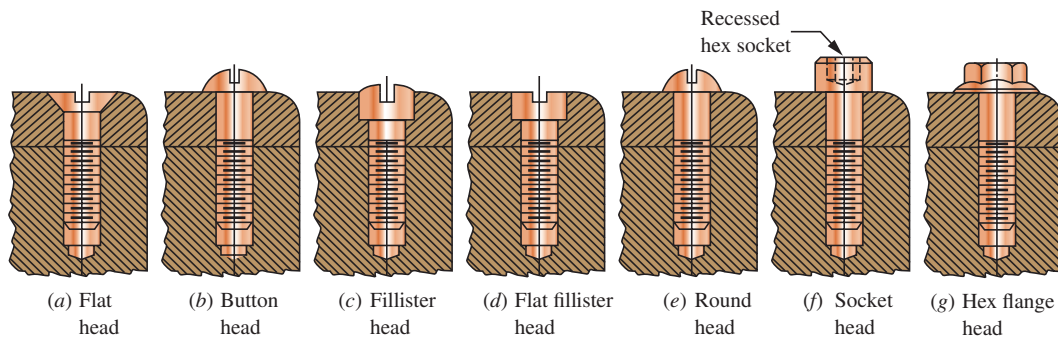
Cap screws or machine screws. See also the hex head cap screw in Figure 19-1
